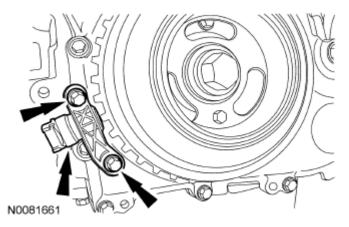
Locating CKP Sensor And Bolts Courtesy of FORD MOTOR CO.
